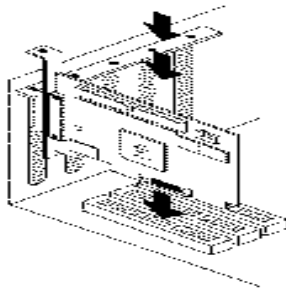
Inserting the SCSI Adapter into a PCI slot
